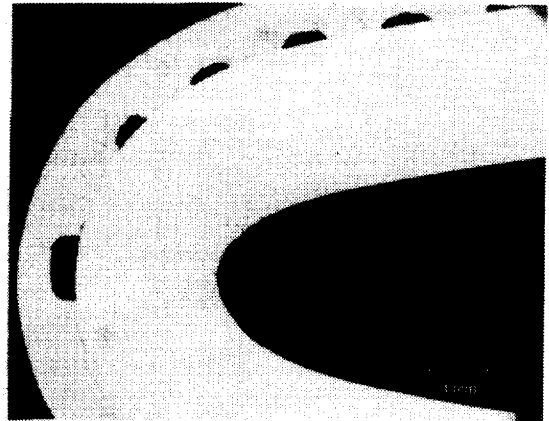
Braze Joints of Forward Strut Wedge Test Specimens
